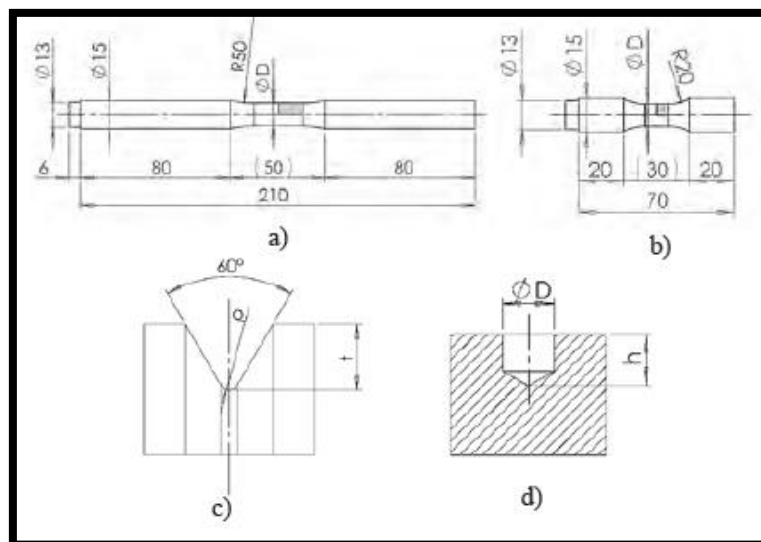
Fatigue Testing Specimen Design - a.) rotating bending specimen, b.) tension compression specimen, c.) circumferential notch geometry, d.) drilled hole geometry. [23]
